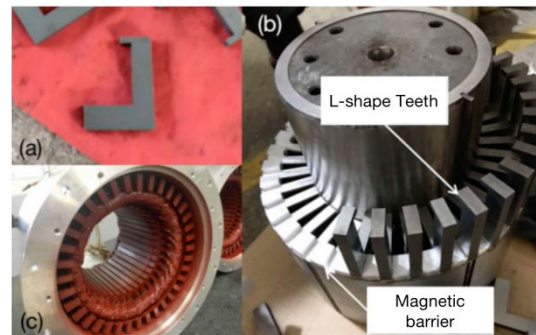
EWM prototype stator parts. (a) L-shape teeth. (b) Stator assembly with #M1 stator, magnetic barrier layer, and L-shape teeth. (c) Stator ready for assembling.
